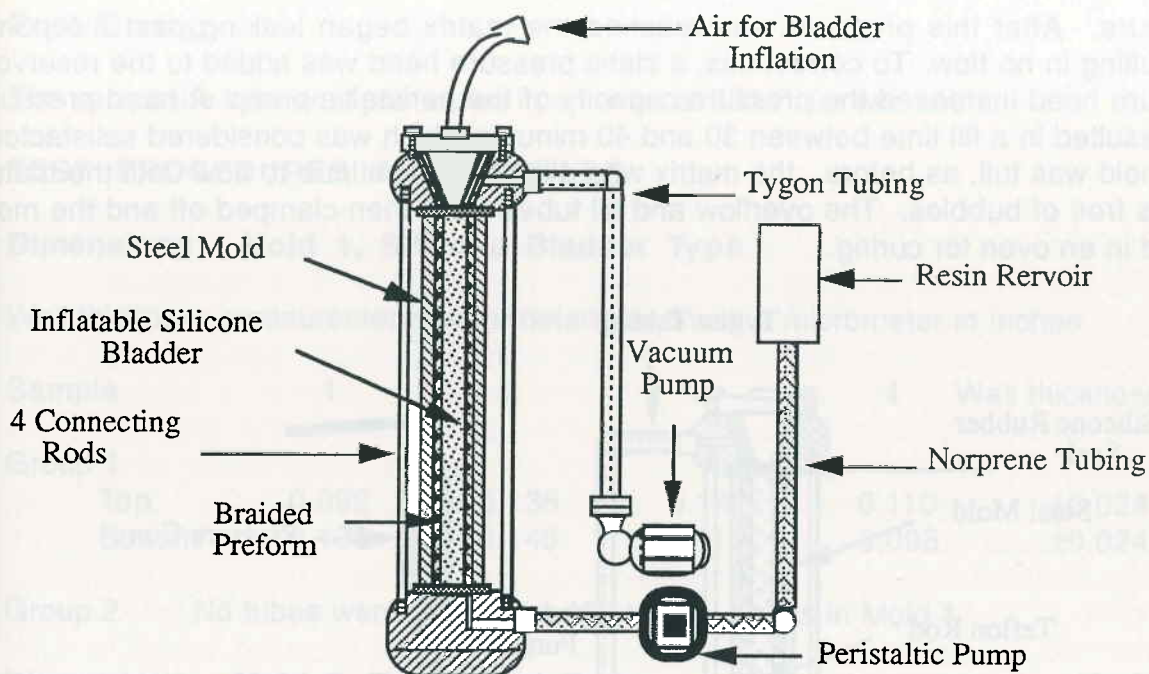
, Laboratory Setup for Filling Mold 1 Containing the Silicone Elastomer Bladder.
